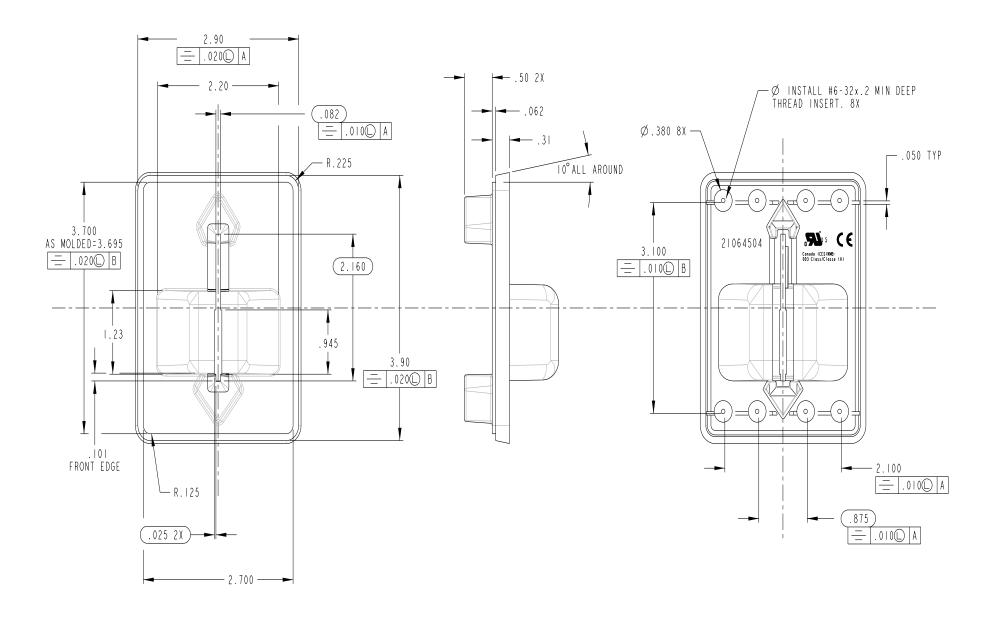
Dimensions for Extended Bezel Design, Sheet 1
